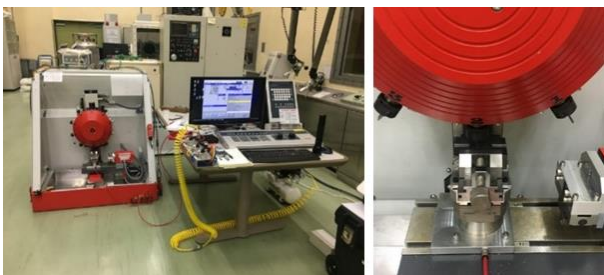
CNC Mill equipment used to remove the heat affected zone from the W-EDM machining.
